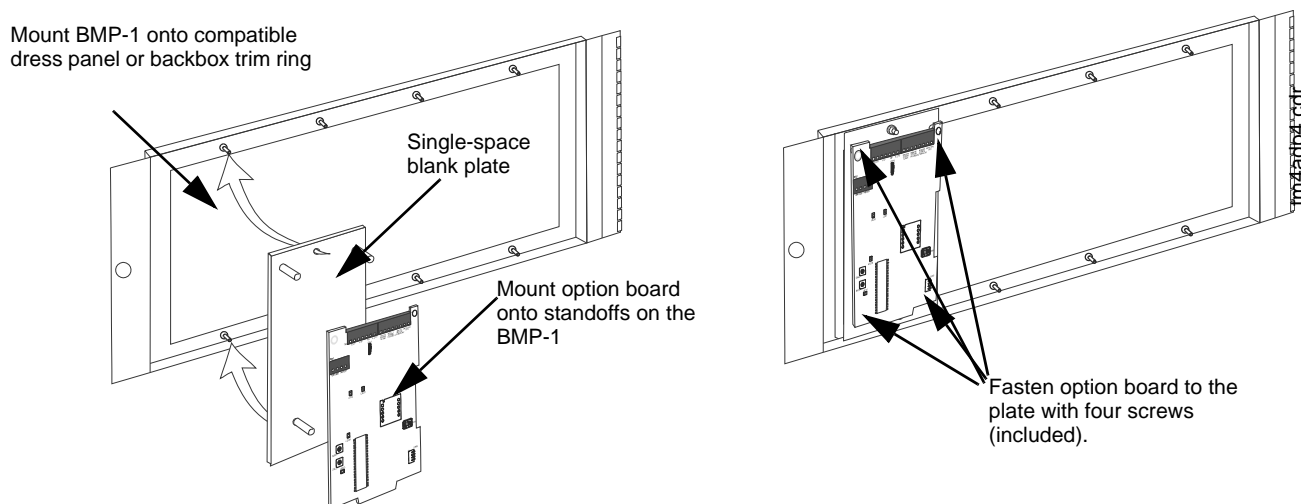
Mounting an Option Board onto a Dress Panel with BMP-1 (ADP-4B Shown)
